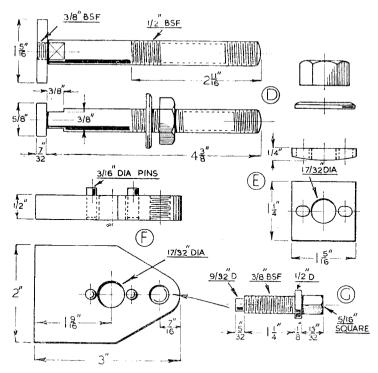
"D"—the clamp-bolt; "E"—the saddle washer; "F"—the clamp plate; "G"—the clamp plate pressure-screw
